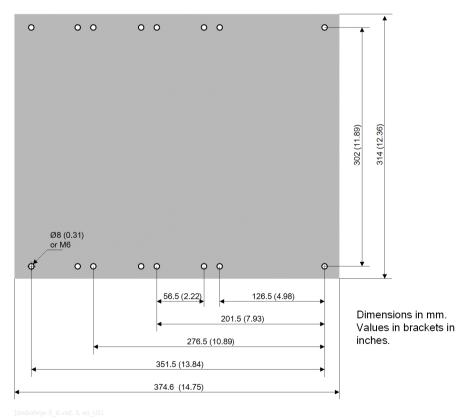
Drilling Pattern of a 5/6 Surface-Mounted Device – 1st Device Row
